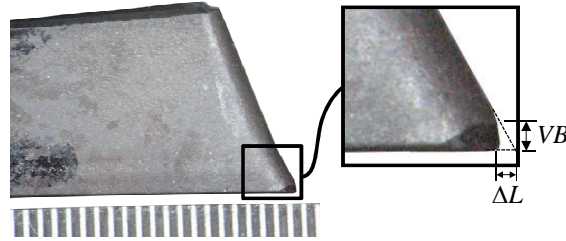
A worn insert depicting flank wear and the probe measurement.
